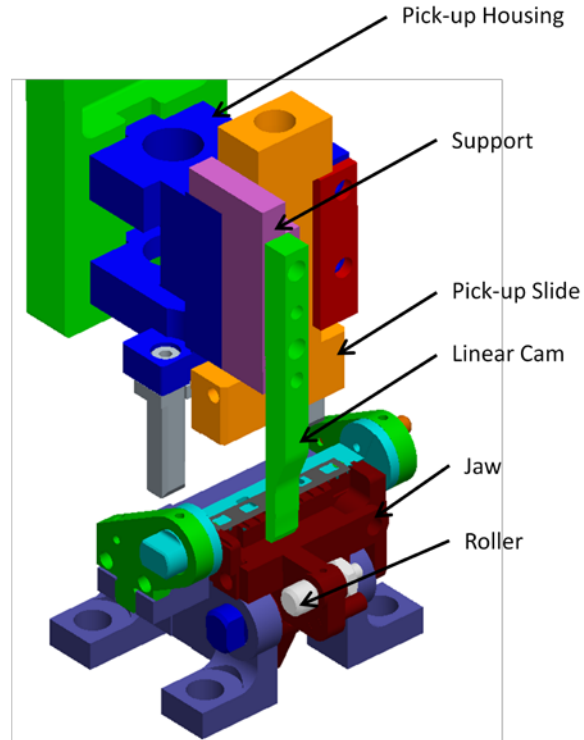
Final Linear Cam Design (Isometric View ProEngineer)
